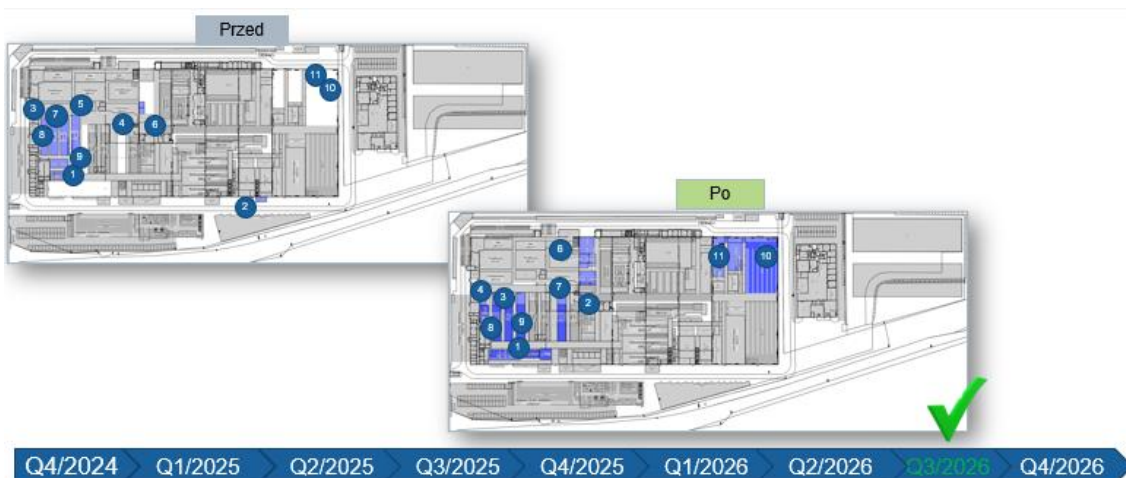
Reconstruction Plan - Stage IX: 1-Transfer of lid and bottom welding stations; 2-Transfer of welding shop offices to the target location; 3-Transfer of welding line No. 1 (LS1); 4-Transfer of water
